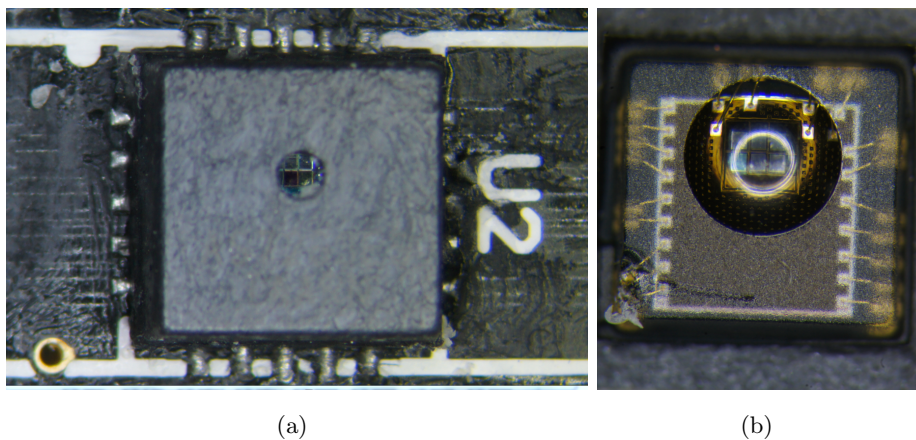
(a) Top view onto the OLGA package mounted onto a PCB, (b) top view onto the clear mold compound of the device.
